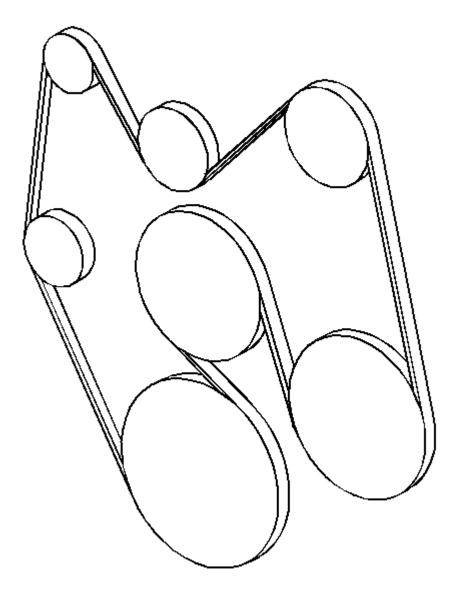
View Of Drive Belt Routing (W/O Air Conditioning) Courtesy of GENERAL MOTORS CORP.
